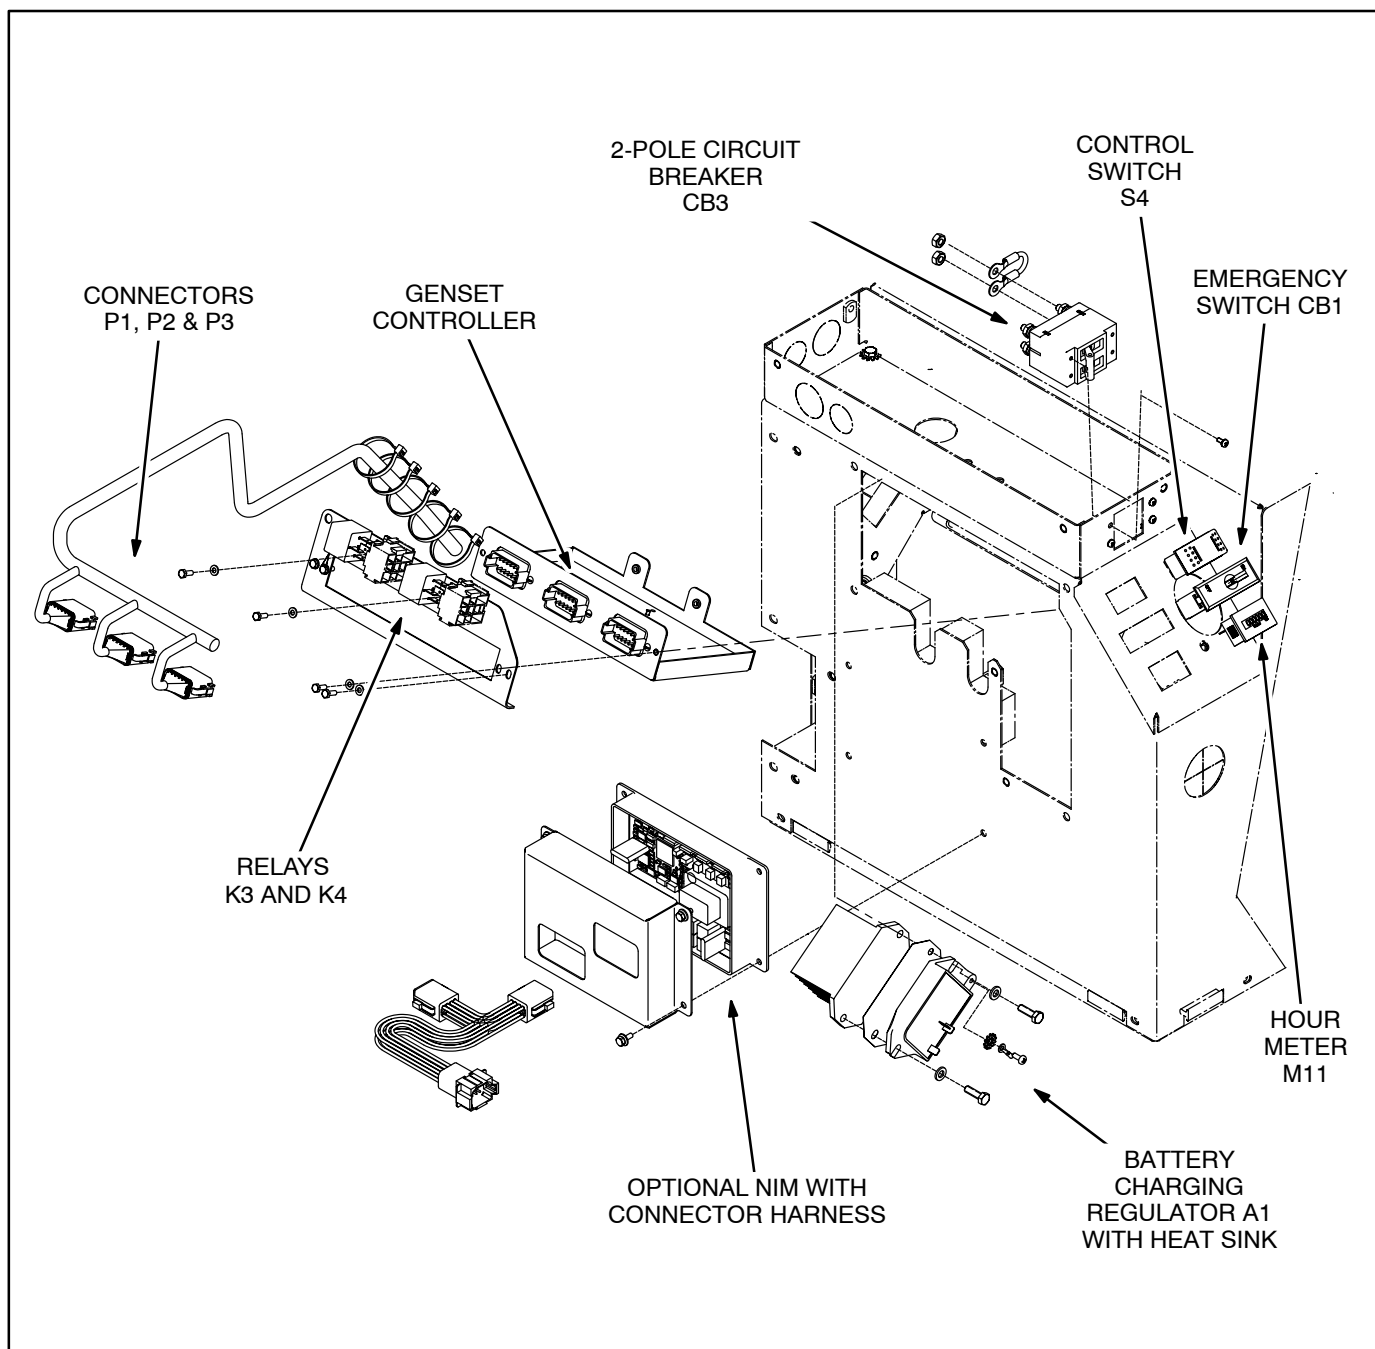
GENSET CONTROLLER AND ITS MOUNTING
